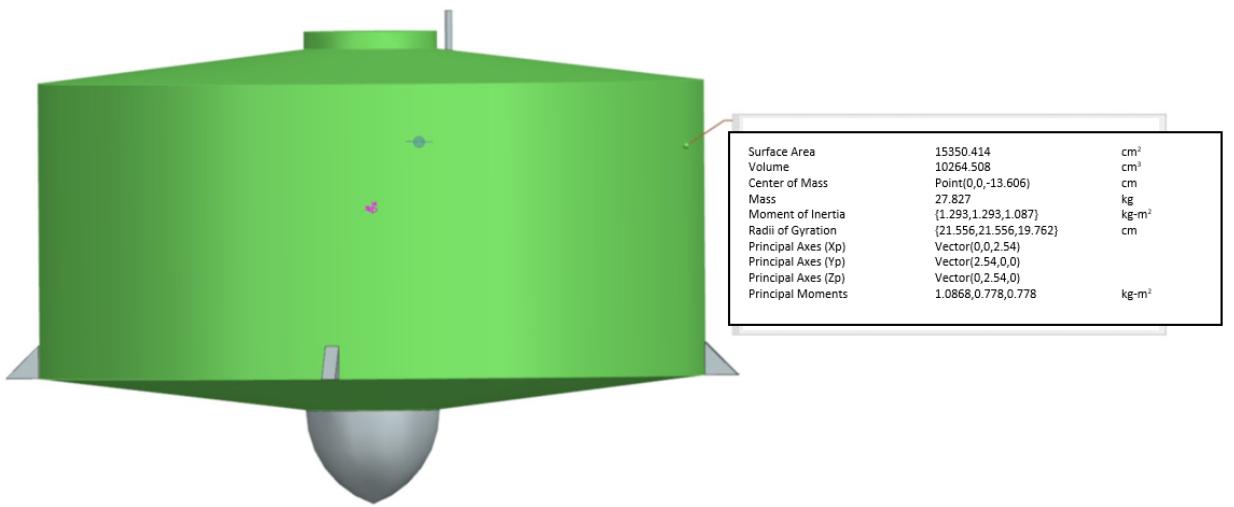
CAD Penetrator Probe Design - Inside Aeroshell
